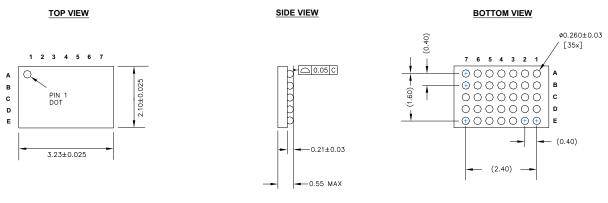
35-Ball WLCSP Package Outline, 001-93741
